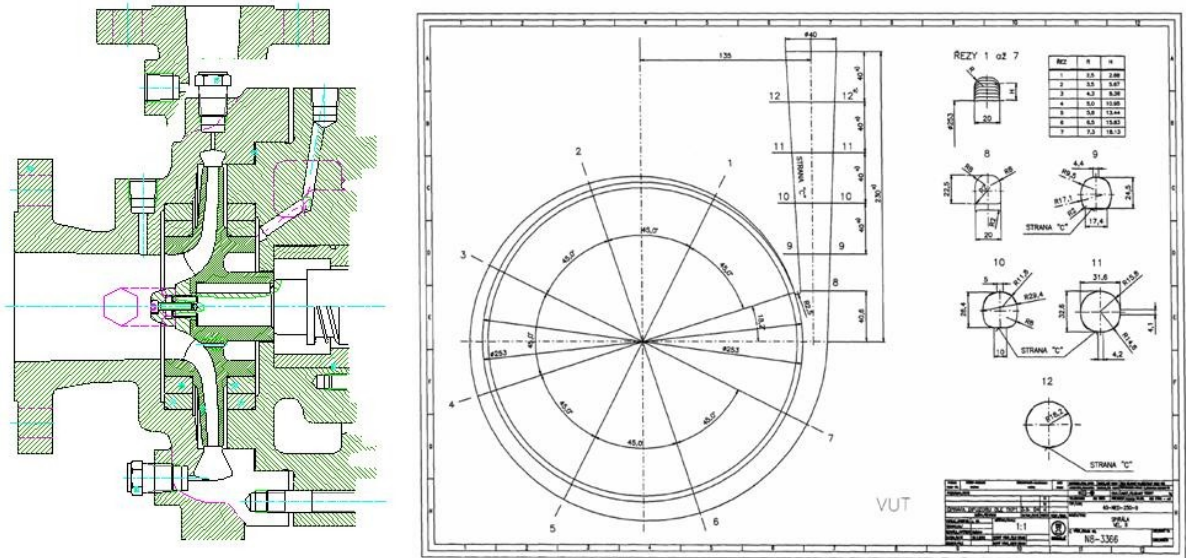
Geometry of the Impeller and Volute (from VUT-Brno)
